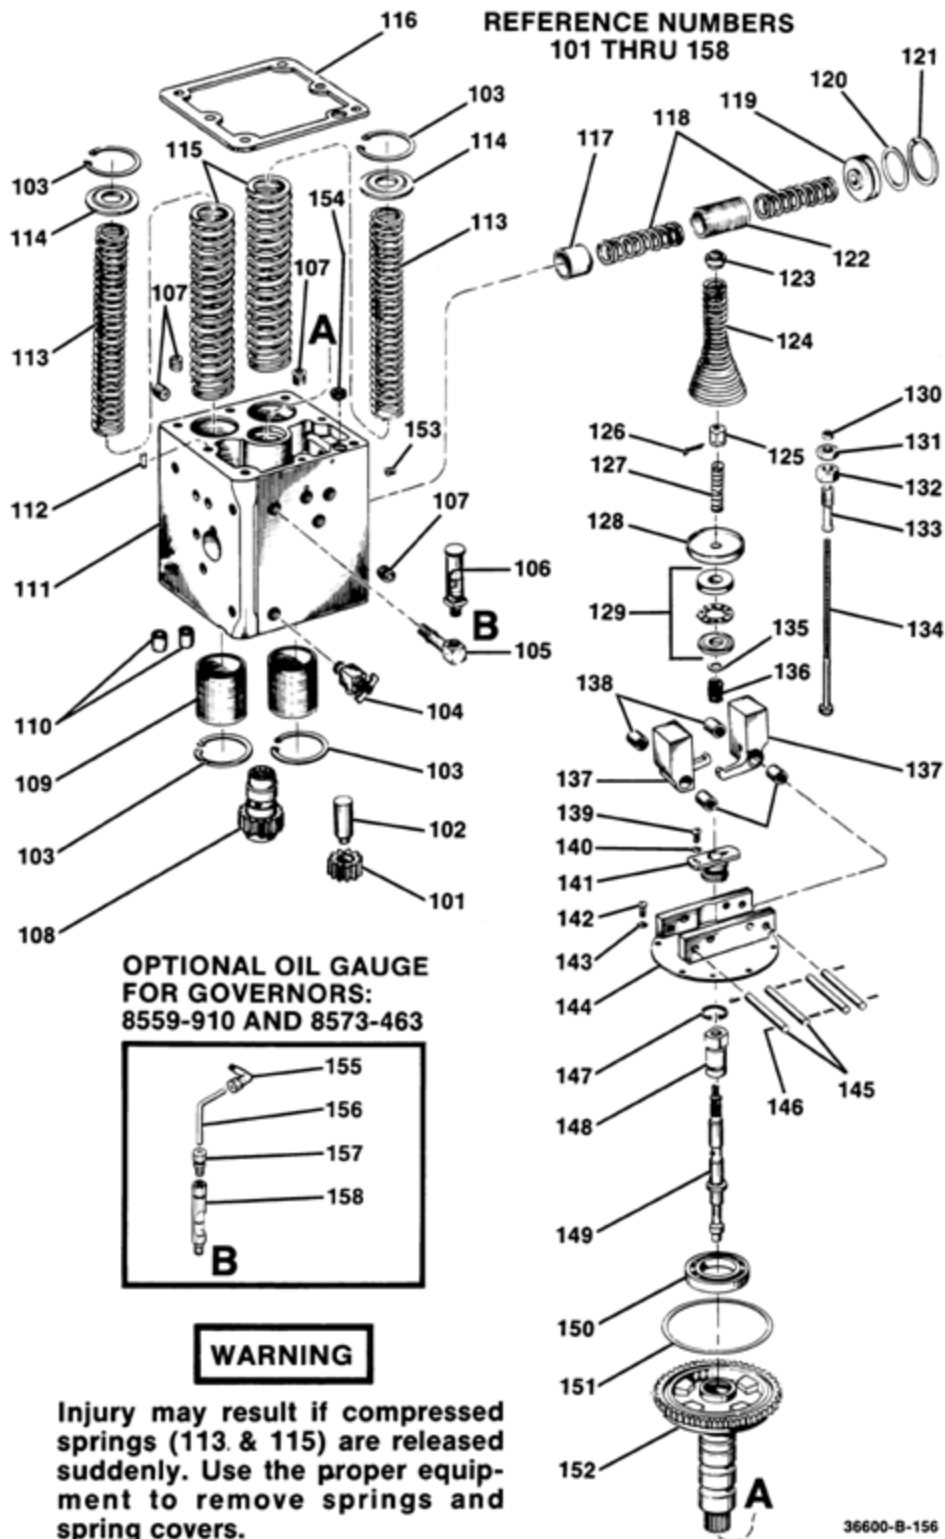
Illustrated Parts of Power Case and Pilot Valve Assembly
